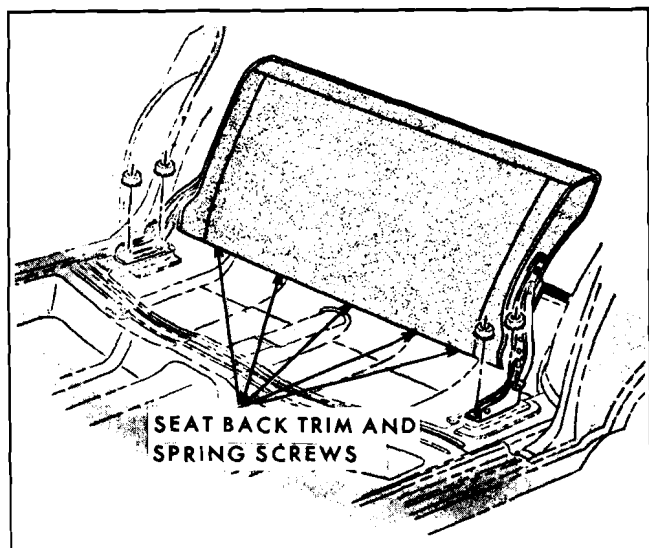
Second Seat Back Trim and Spring Assembly
